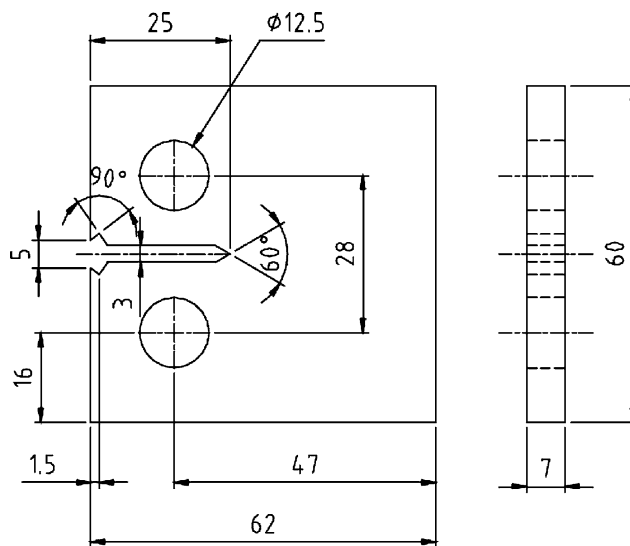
Geometry and dimensions of C(T) specimens for crack propagation tests performed at constant ΔK and increasing R according to ASTM-E647-05 (dimensions in mm)
